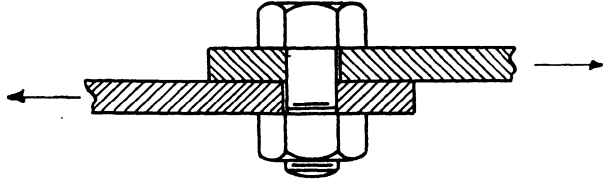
EXAMPLE OF SINGLE SHEAR
